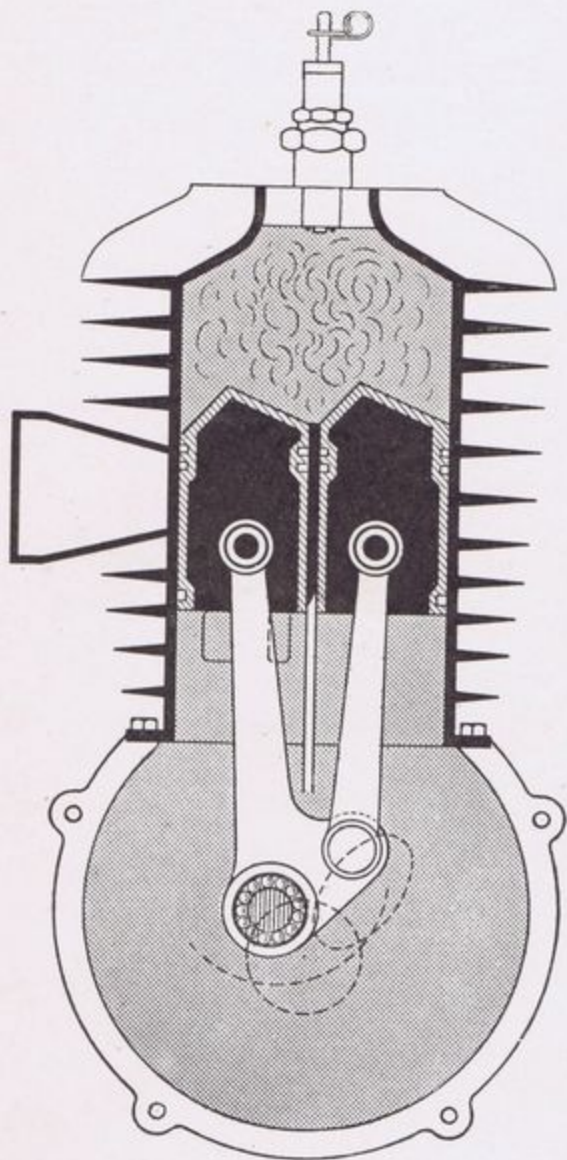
The Zoller Supercharged Two-stroke Engine.
